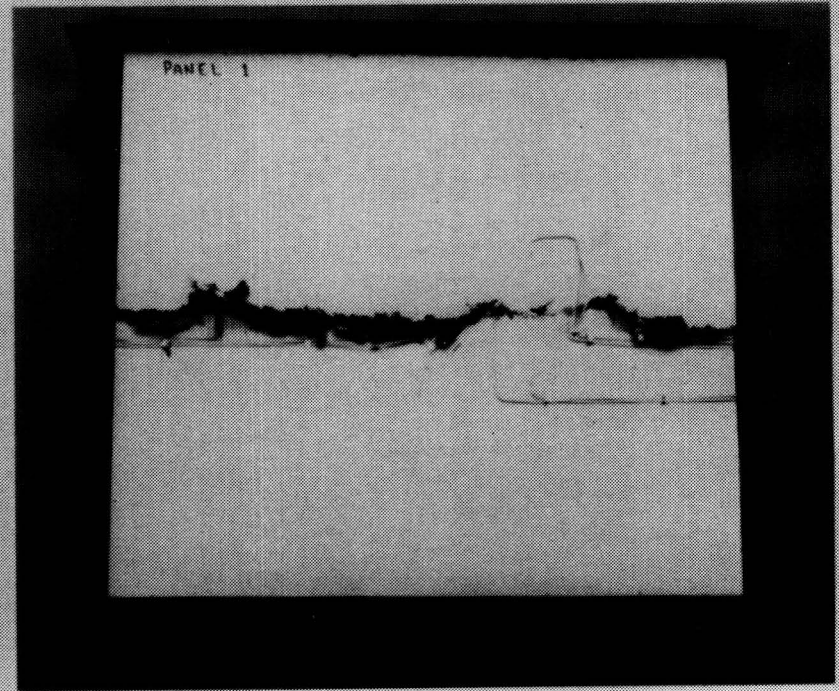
shows failure photographs of the 3-stiffener panel fabricated from all AS4 braided/woven stiffeners stitched to the all AS4 Saerbeck warp knit wing lay-up skin material which was impacted mid-bay at 100 ft-lb. As with the single-stiffener failures there was no skin stiffener separation for any of the 3-stiffener compression panels tested in this investigation. The failure shown is typical for all panels tested, although the panels tested without impact damage failed nearer the end of the panel.
